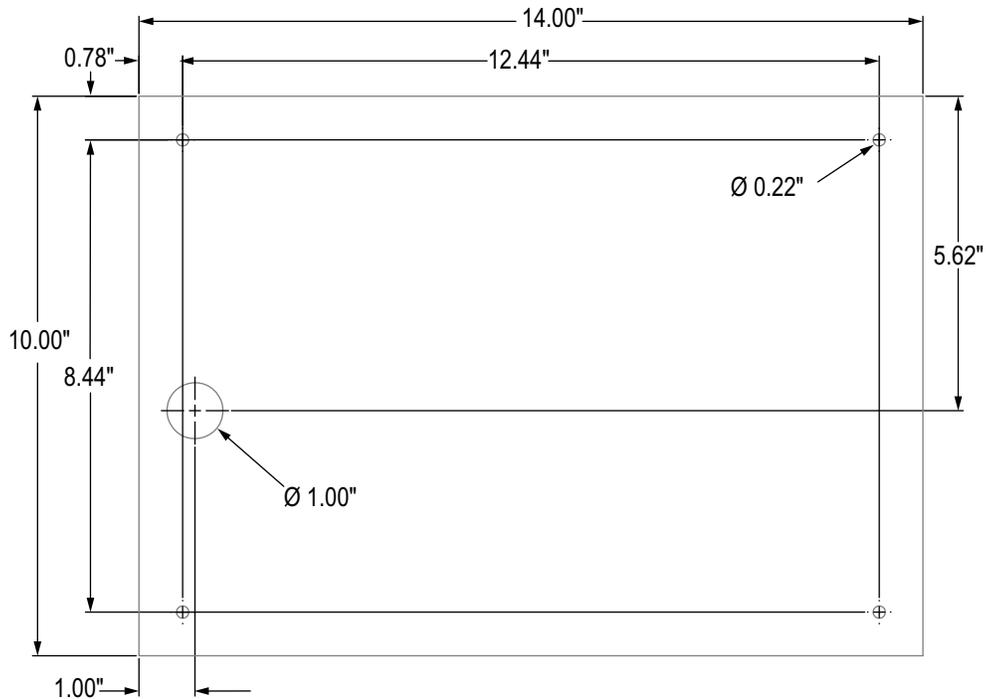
12" Touch Only Panel Mount Dimensions
